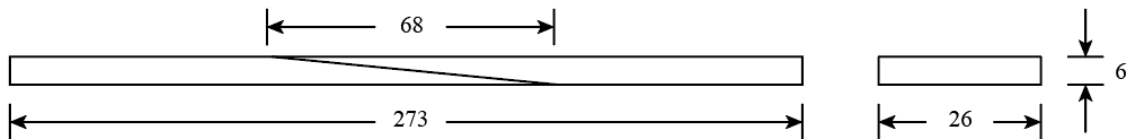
Side and cross-sectional views of composite scarf tension specimen dimensions (mm).
